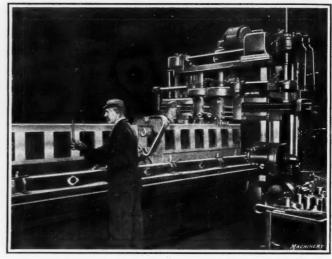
Ingersoll Milling Machine working on Crank-case of Six-cylinder, 120-horsepower Engine and Radiator Headers simultaneously
